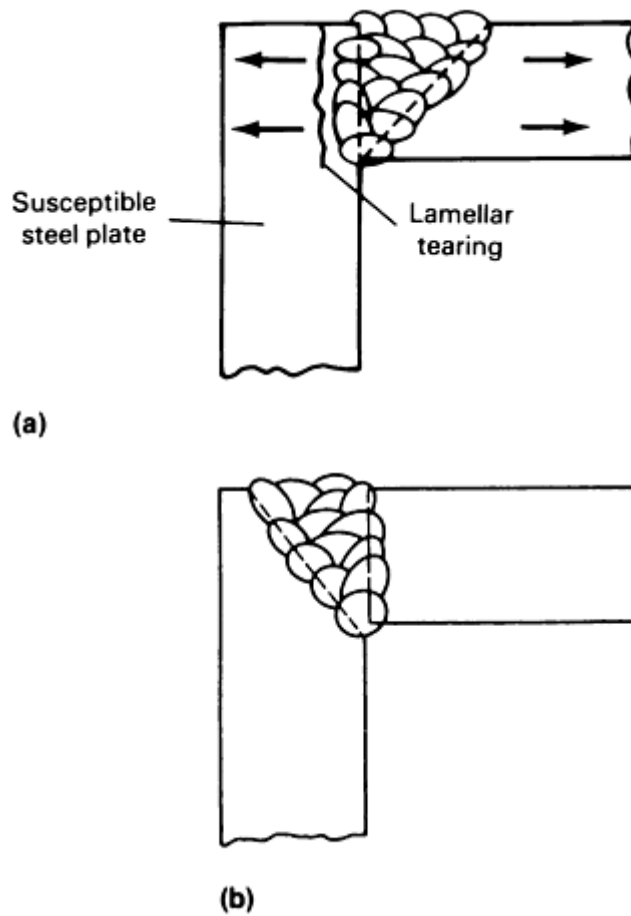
CORNER JOINT. (A) LAMELLAR TEARING SURFACES AT THE EXPOSED PLATE EDGE. (B) REDESIGNED JOINT
